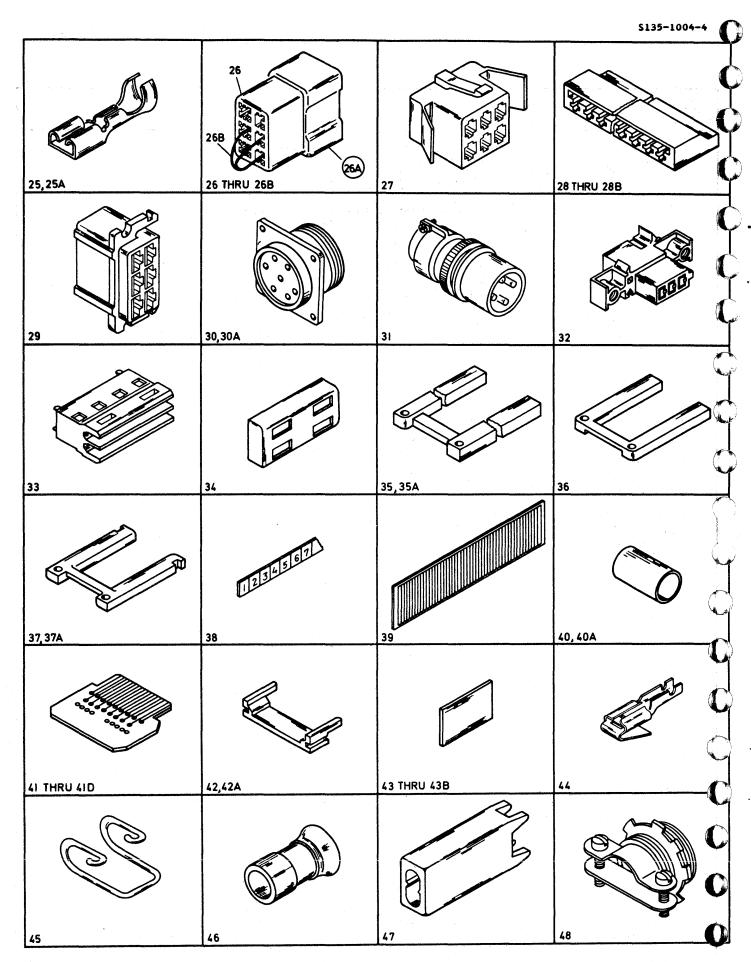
CABLE ASSEMBLIES WITH COMPONENT PARTS (SHEET 2 OF 6, INDEX NO. 25 THRU 48)
